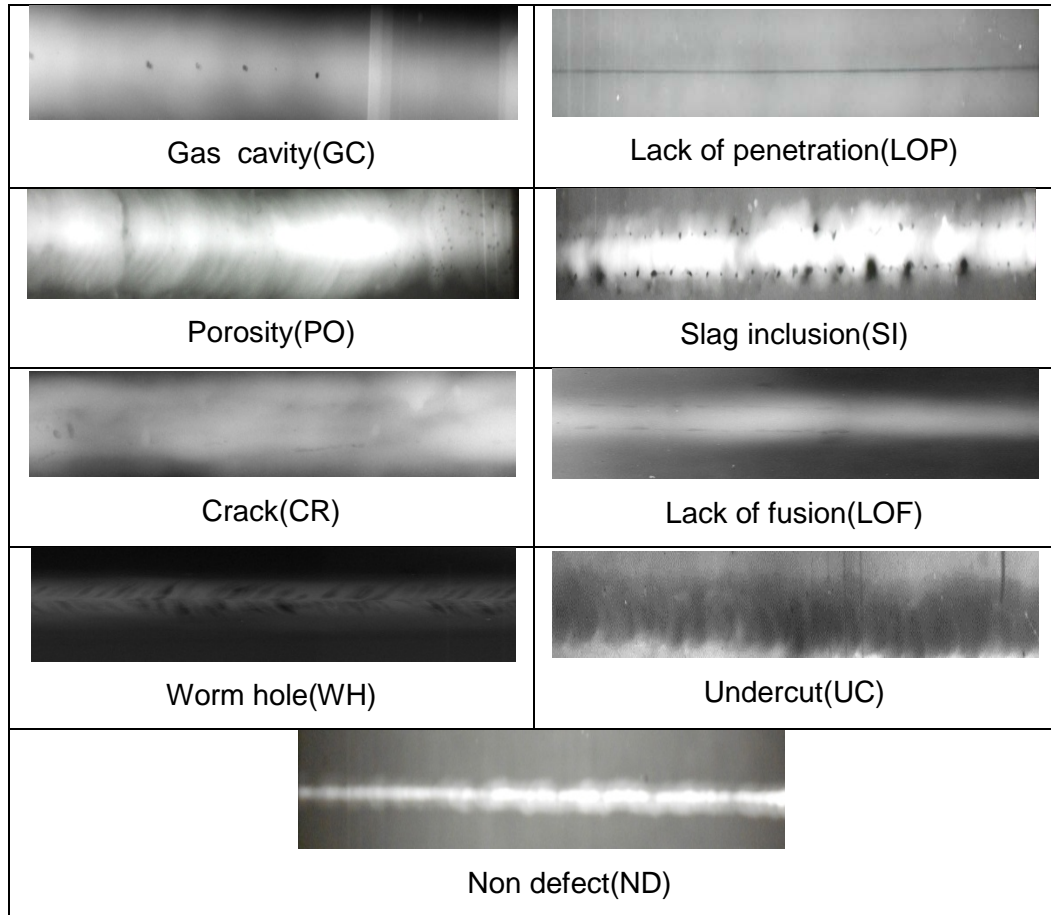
Digitize images of radiographic weld flaws.
